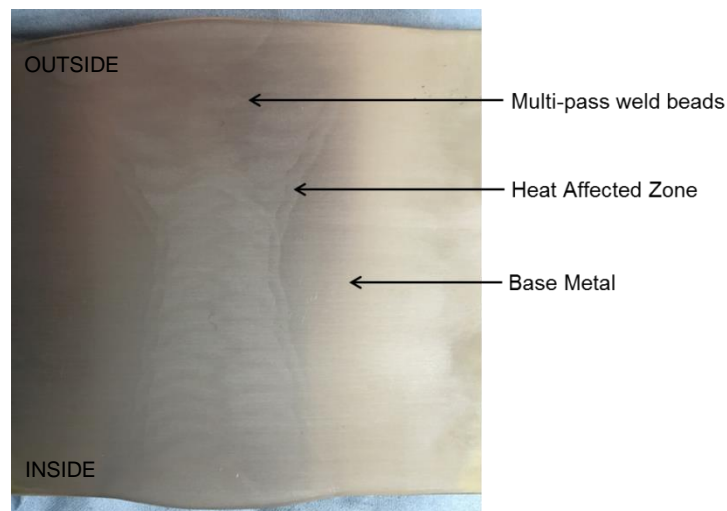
Weld macrograph after polishing and etching of the welded plate
